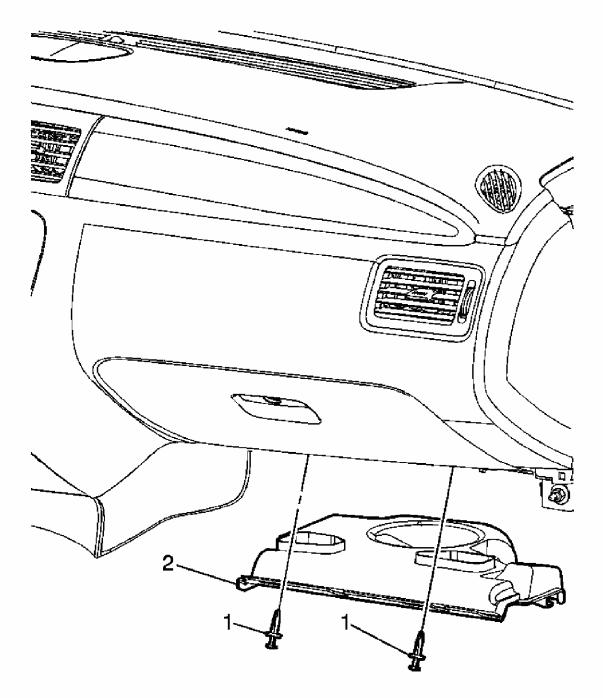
Locating Right Side Insulator Panel Courtesy of GENERAL MOTORS CORP.
